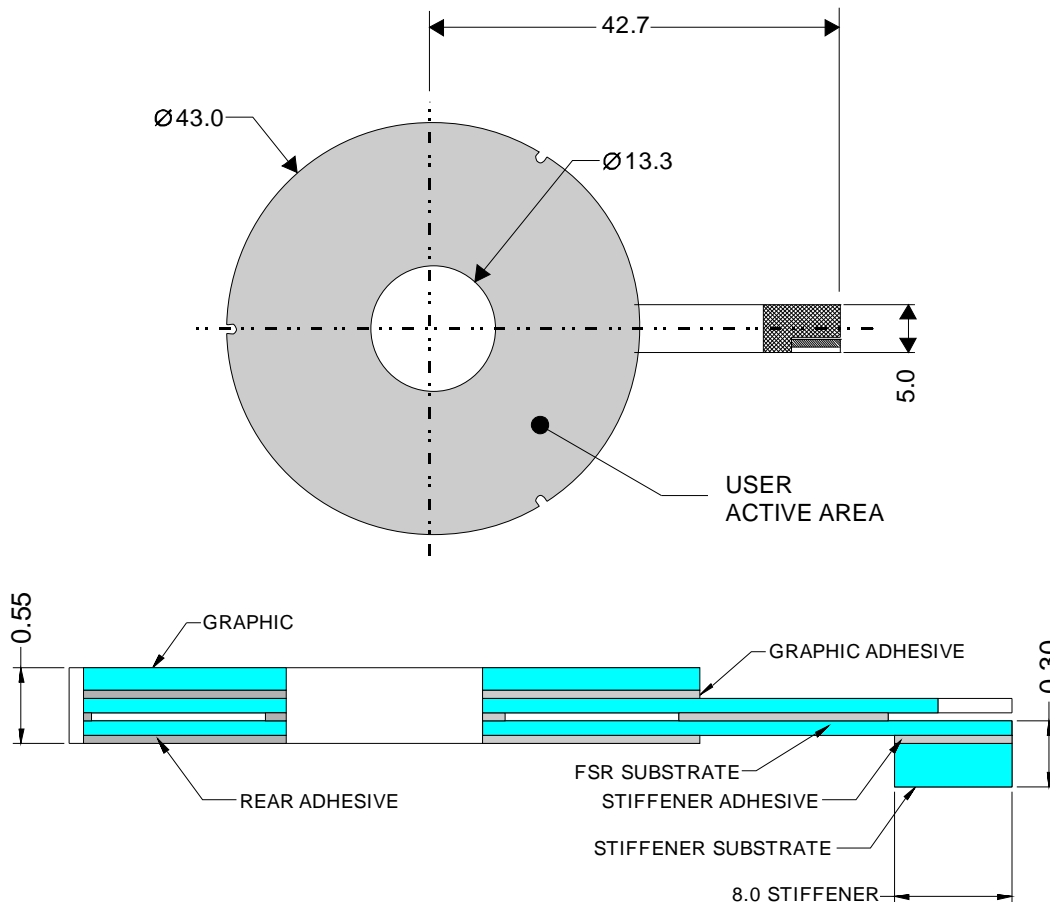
Overall dimensions of the Ring Sensor. All dimensions are in millimeters.
